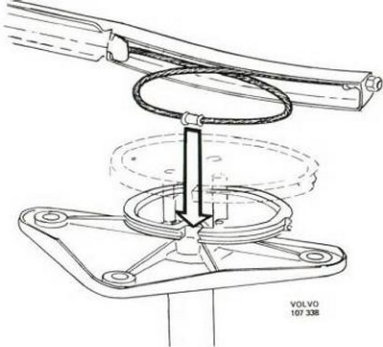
Installing cable for parallel drive link, right-hand side
